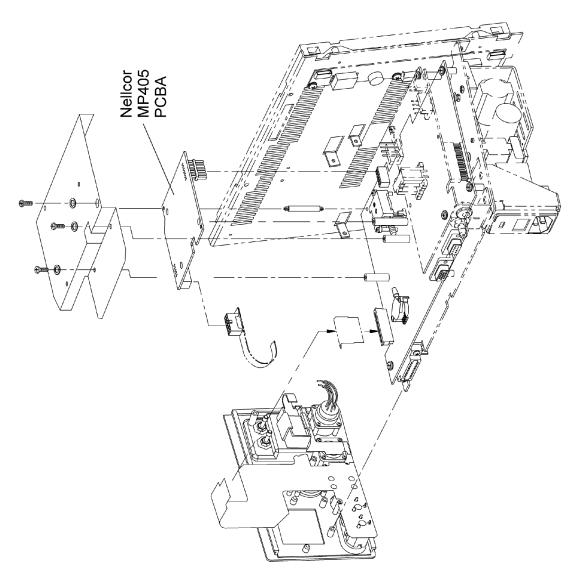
Nellcor MP405 SPO2 PCBA Assembly
